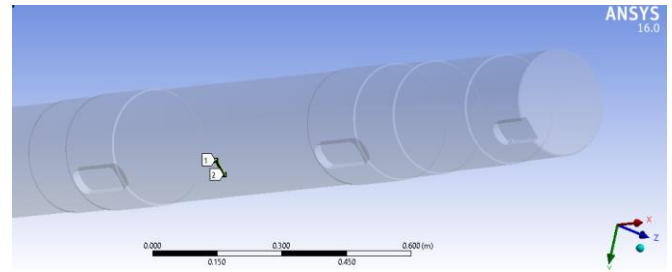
Modified Shaft Design 3 with Materials EN24 Fracture Analysis-SIFS K1
